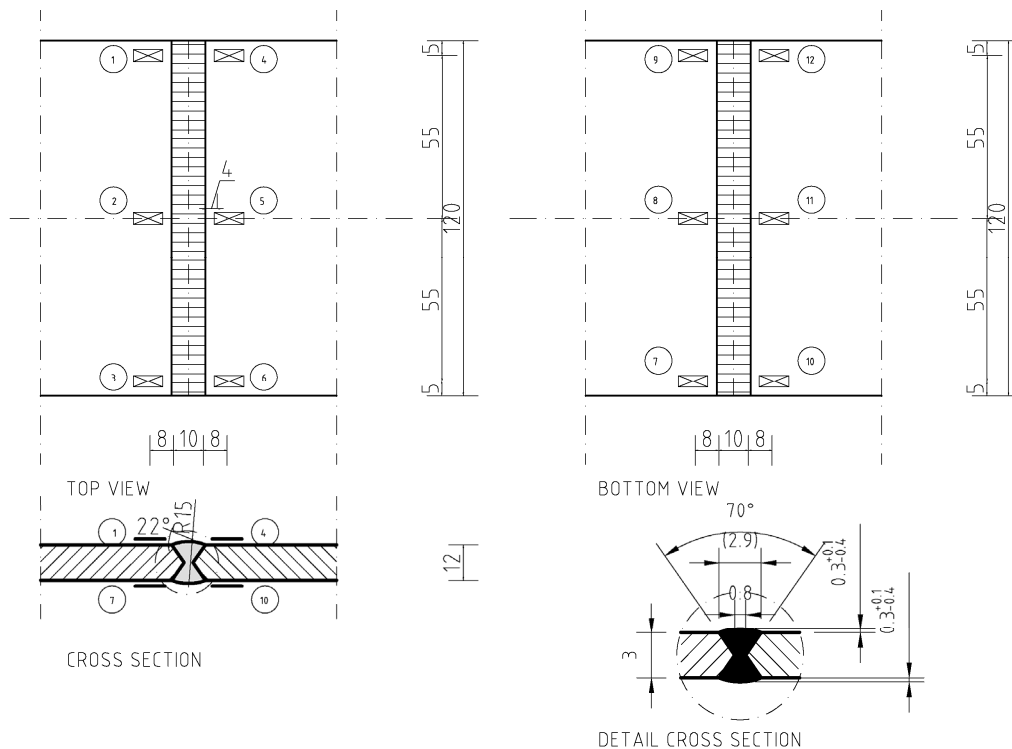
Instrumentation of S690 Transverse Butt Weld Fatigue Specimens
